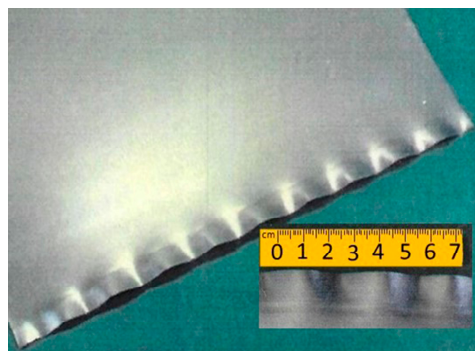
Illustration of defects on strip edge, dimensions in cm.
